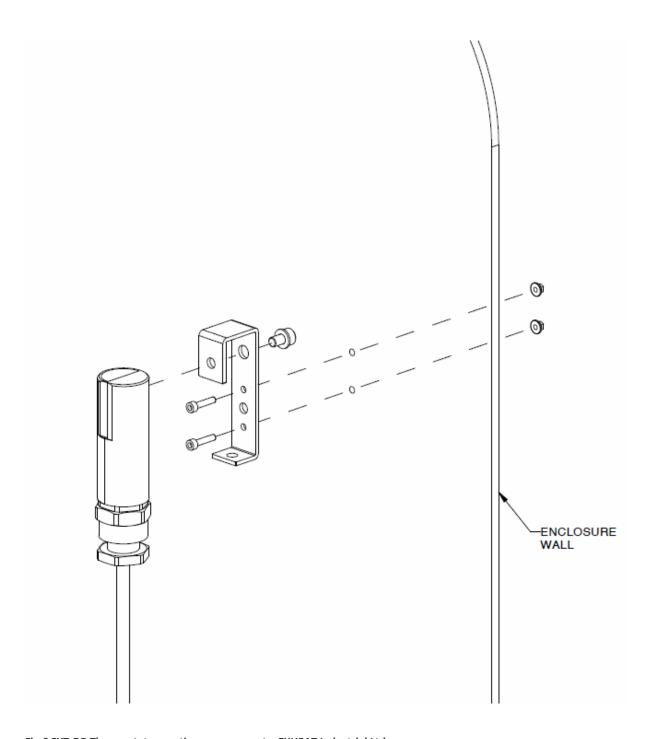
FXT-DR Thermostat mounting arrangement - EXHEAT Industrial Ltd
